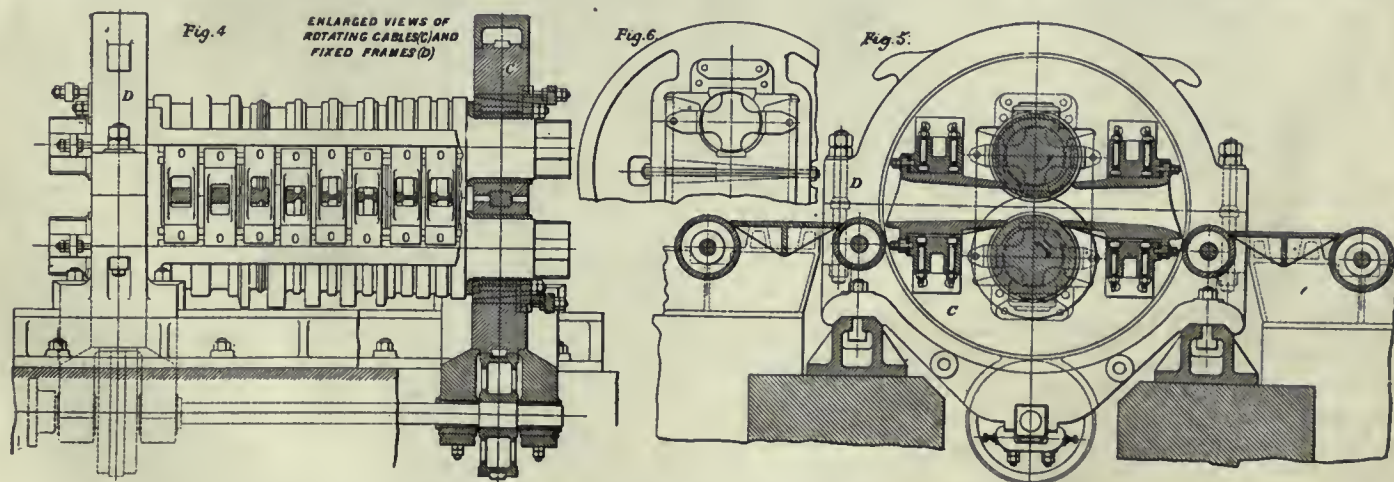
ENLARGED VIEW OF ROTATING GABLES (C) AND FIXED FRAMES (D).
